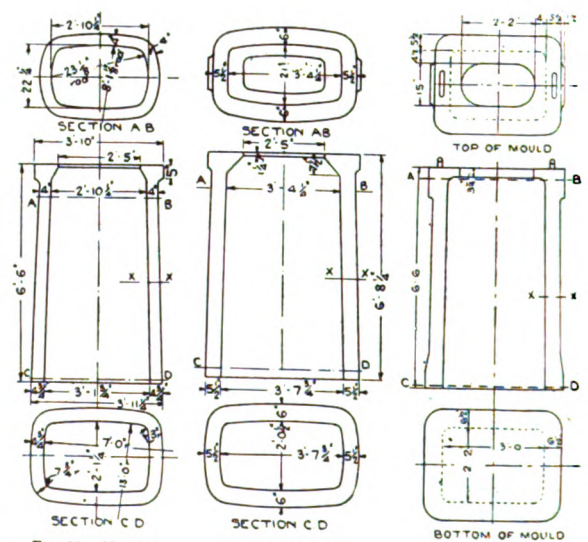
Mould J. FIG. 11.—Mould K. FIG. 12.—Mould L.
